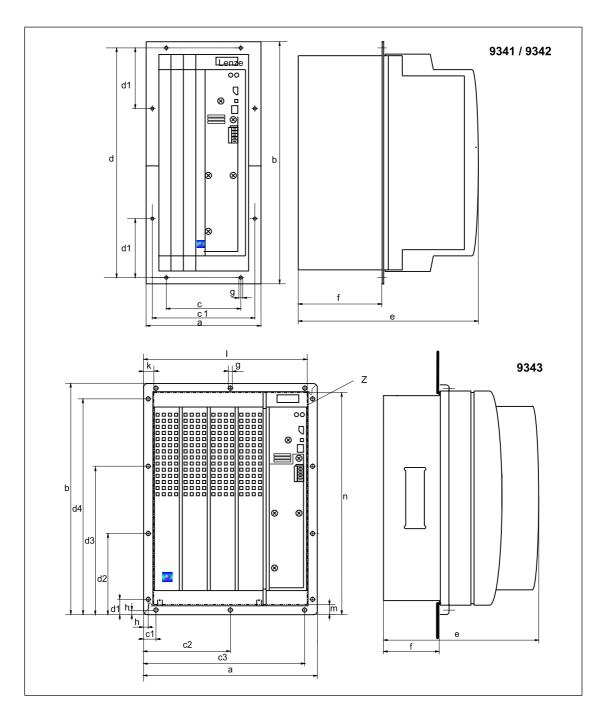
934X dimensions: Assembly with thermally separated power stage
